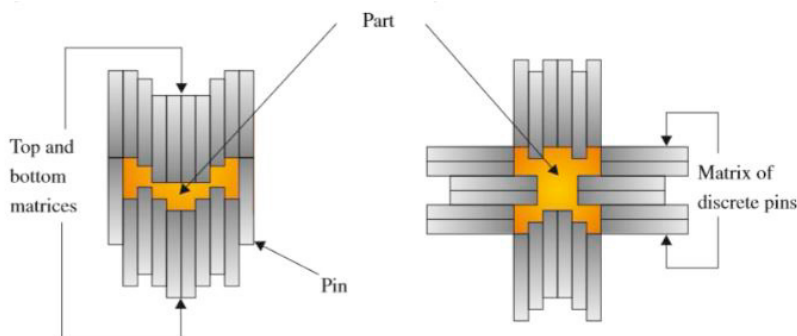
Cross-sectional view of a reconfigurable mold tool, derived from [22].
